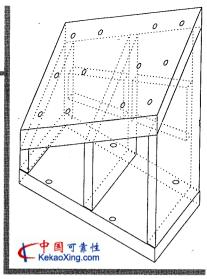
Diagram of ESS skewed fixture; fixture is 5.5 inch x 10 inch; X = Y = 0.75Z.
